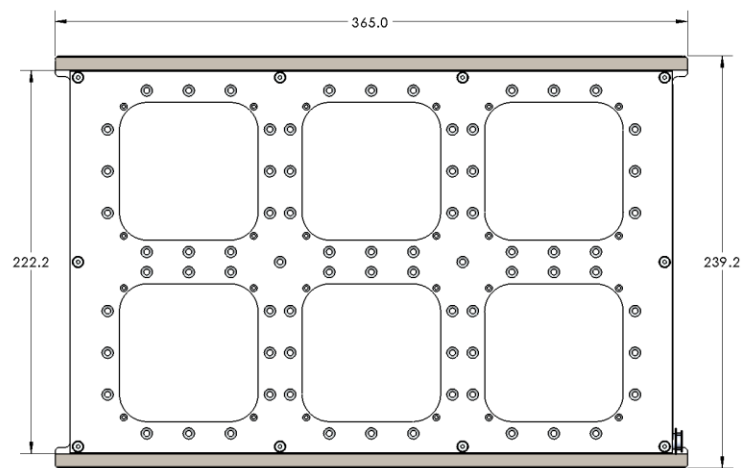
EXTERNAL DIMENSIONS - TOP
